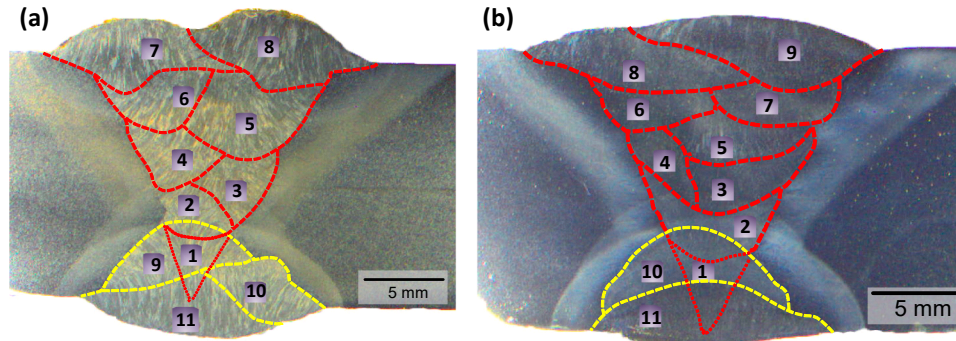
The multipass butt welded joints schemes considering the back-chipping processing. (a) Evenmatched welds, (b) Undermatched welds.
